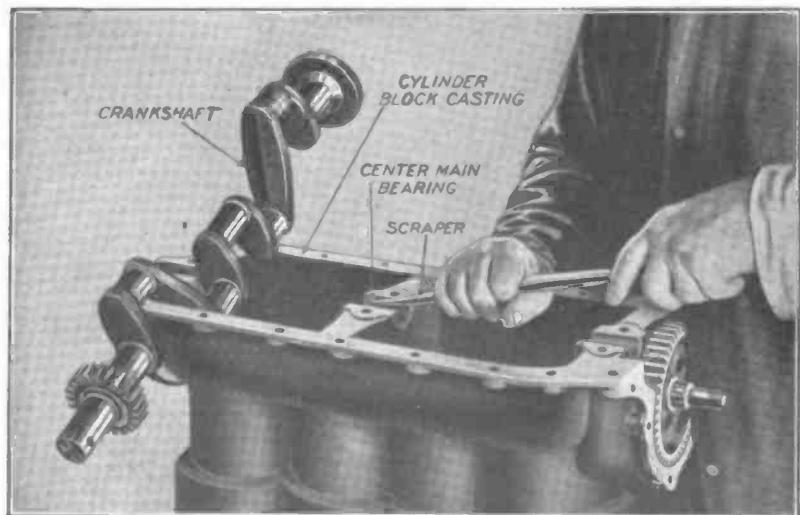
Showing method of scraping in main bearings to fit crankshaft journals
